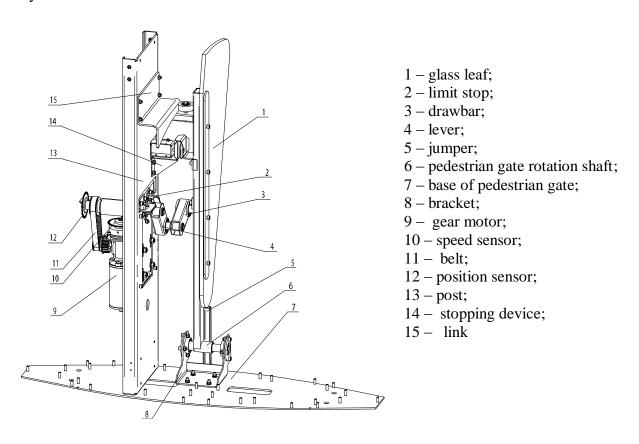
Actuating mechanism of the turnstile «SPEED BLADE» type
